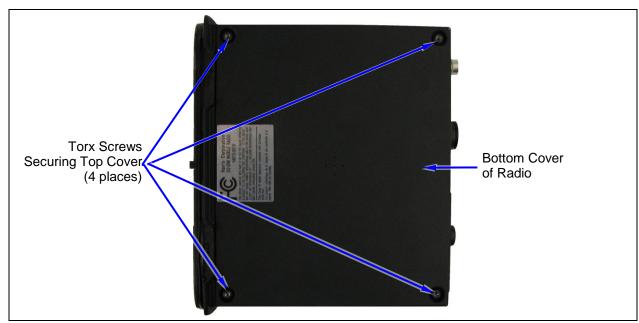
Removing the Main Board (Bottom Cover Removal)
